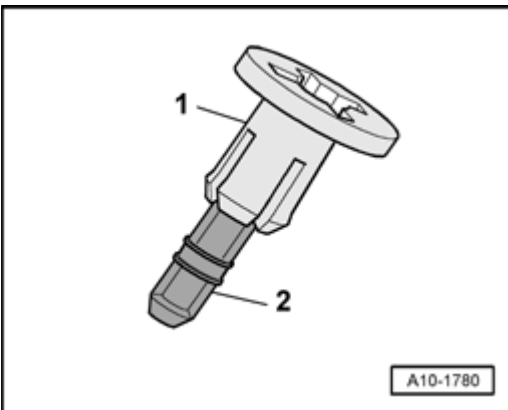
Identifying Fasteners At Lock Carrier & Pin
